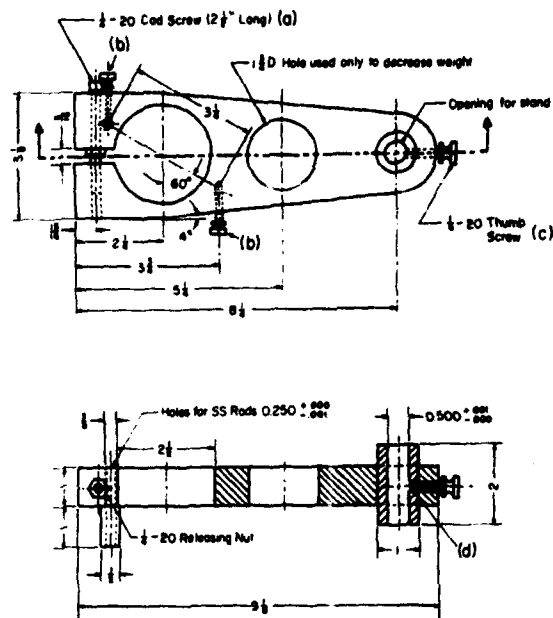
continued*. Upper diagram shows a top view and cross-section of the sonifier holder. The lower diagram shows a side view and cross-section of the holder.
